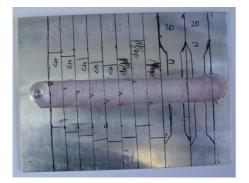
Schematic of specimens locations in FSW welded joint.
